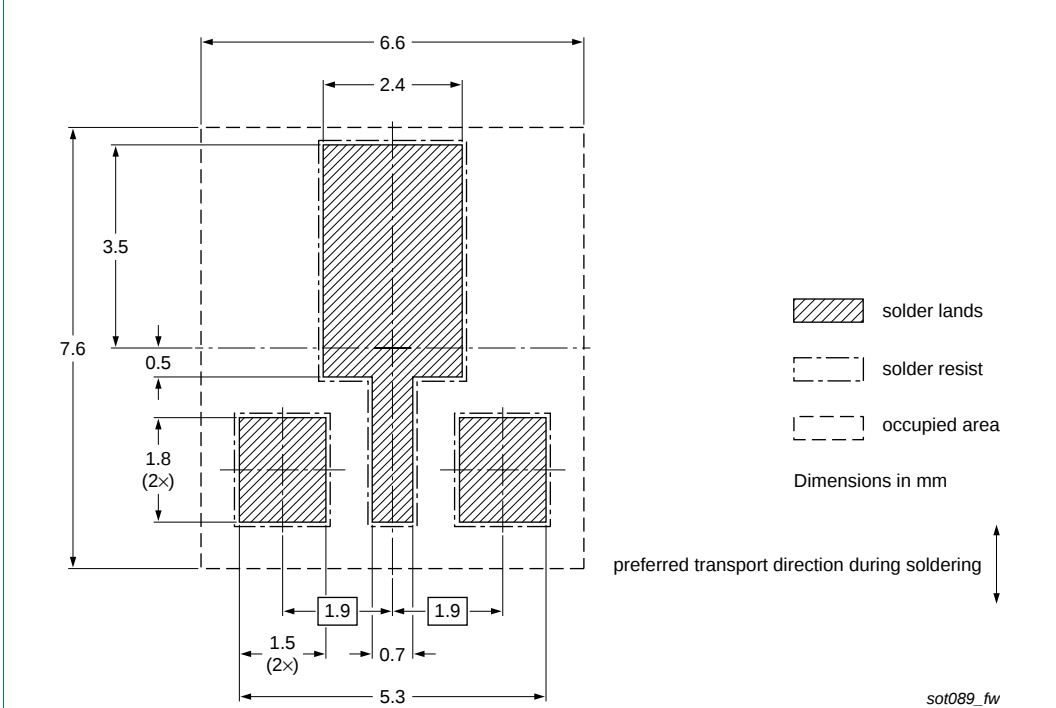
Wave soldering footprint SOT89 (SC-62/TO-243)
